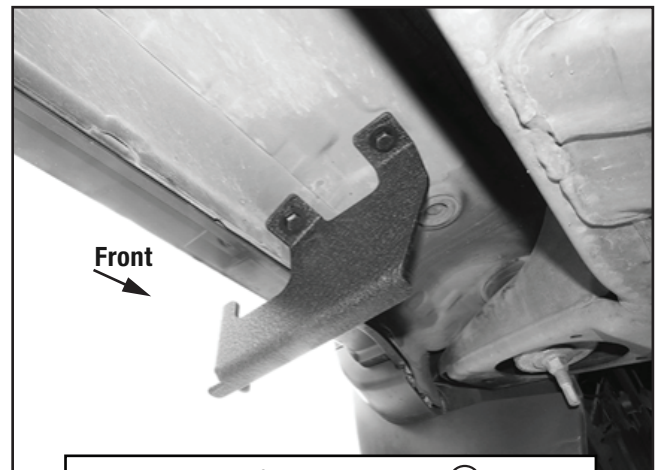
Driver/left front mounting location. Remove plugs from threaded holes (arrows)
